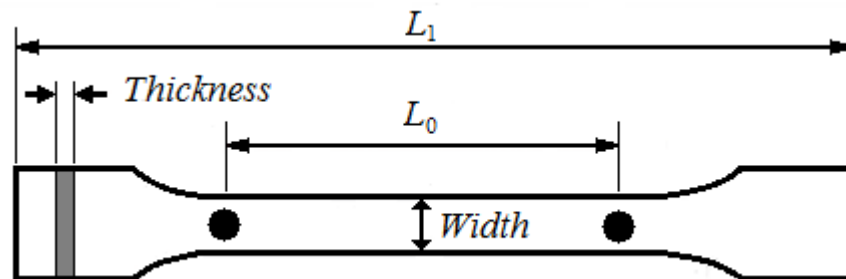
Dimensions of the tensile specimen. $L_1 = 65\text{mm}$, $L_0 = 30\text{mm}$, width = 3.1mm with dots for video-extensometer.
